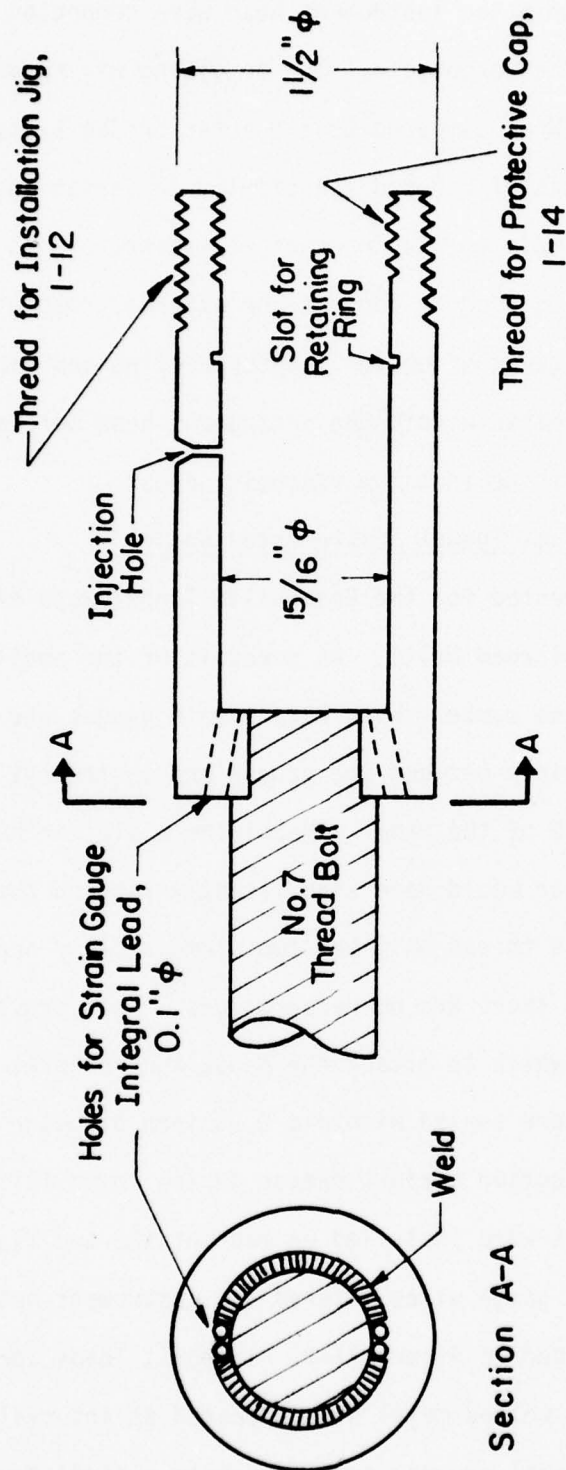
Section of Instrument Head, Shop Drawing, Design Employed at Bonneville Pilot Tunnel
